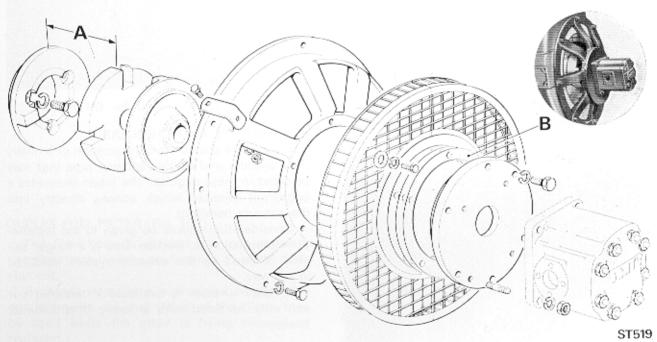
Hydraulic Pump Mounting-Flywheel End
